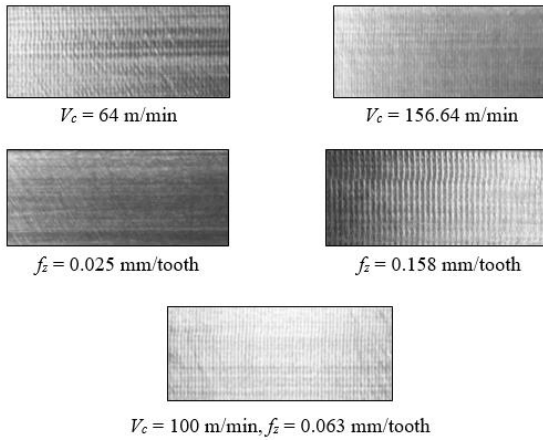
Surface photography of thin-walled workpiece Ti6Al4V on machining using coated carbide tools
